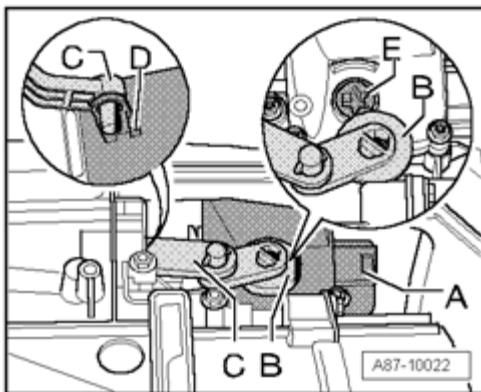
Identifying Connecting Element, Control Motor, Connecting Rod, And Lever
